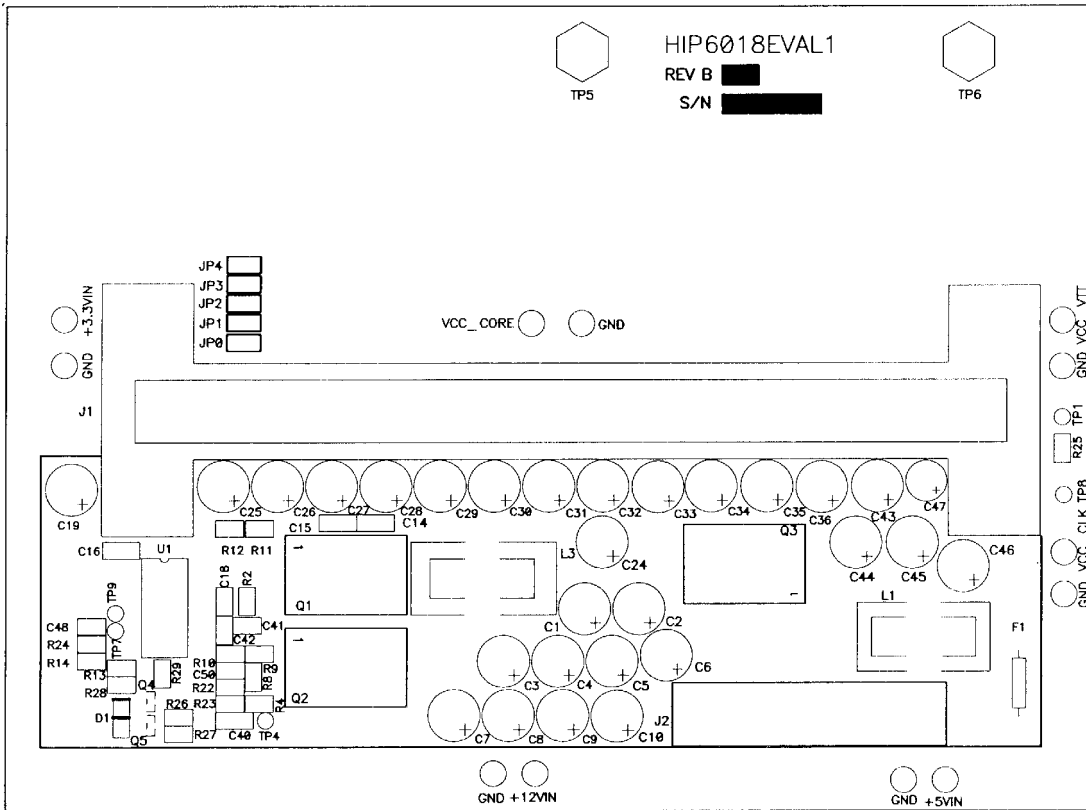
HIP6018EVAL1 COMPONENT LAYOUT
